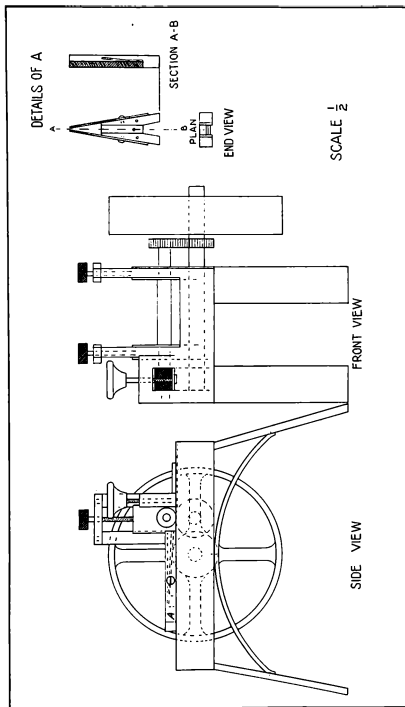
Plate XIV-B. Machine by which the proper thickness of weaver is produced.
